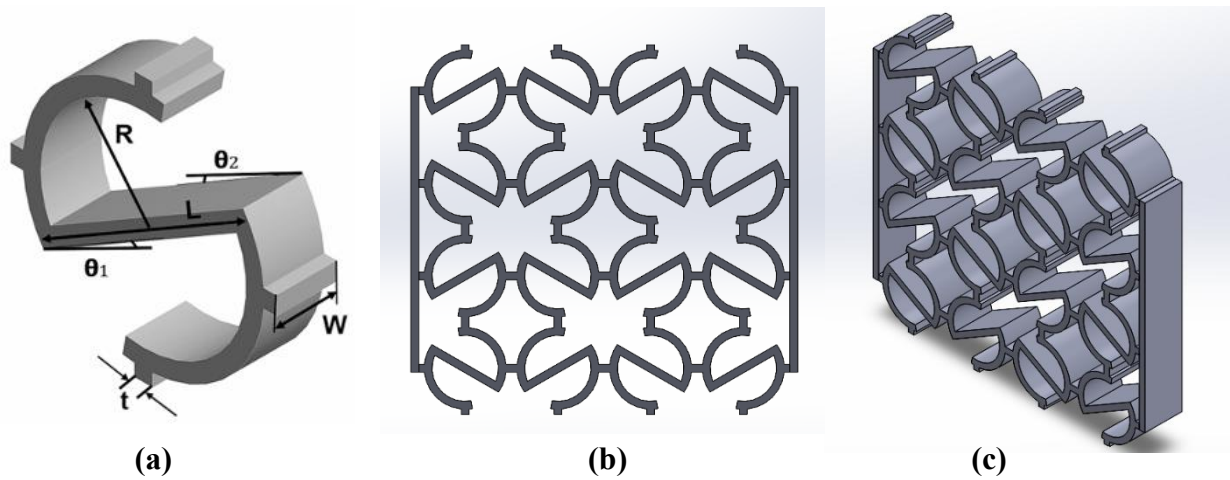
(a) Unit cell of S-Shaped Structure with dimensions, (b) Front view of S-Shaped Structure, and (c) Isometric View of S-Shaped Structure
